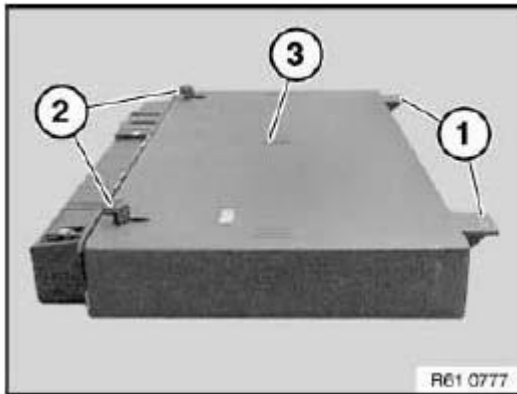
Identifying Mounts And Retaining Lugs Of Control Unit
